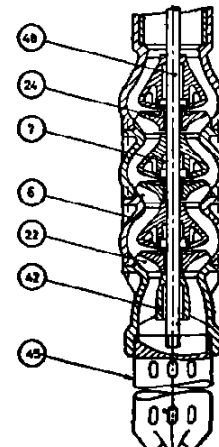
BOWL ASSEMBLY WITH SEMI-ENCLOSED TYPE IMPELLER
